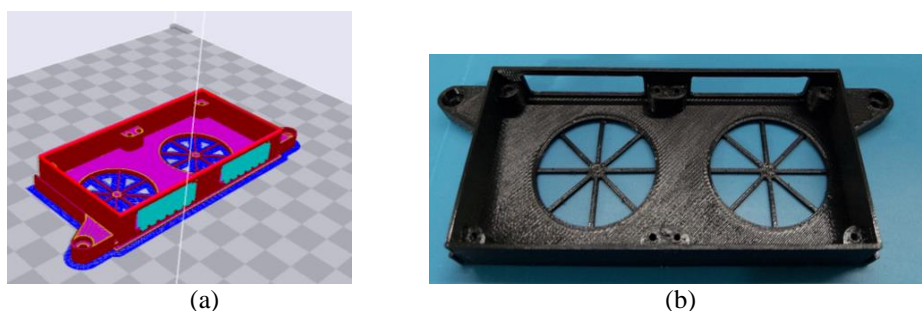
(a) Setting up parameters for manufacturing [8], (b) 3D printed carrier [8]
